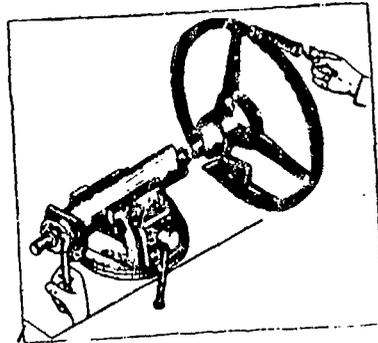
Adjusting and checking the tightness of the steering wheel shaft bearings
